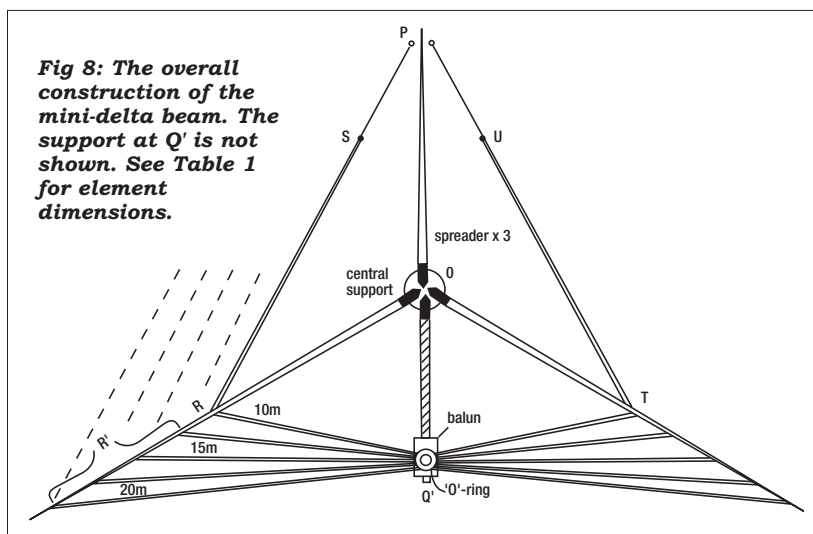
The overall construction of the mini-delta beam. The support at Q' is not shown. See Table 1 for element dimensions.
